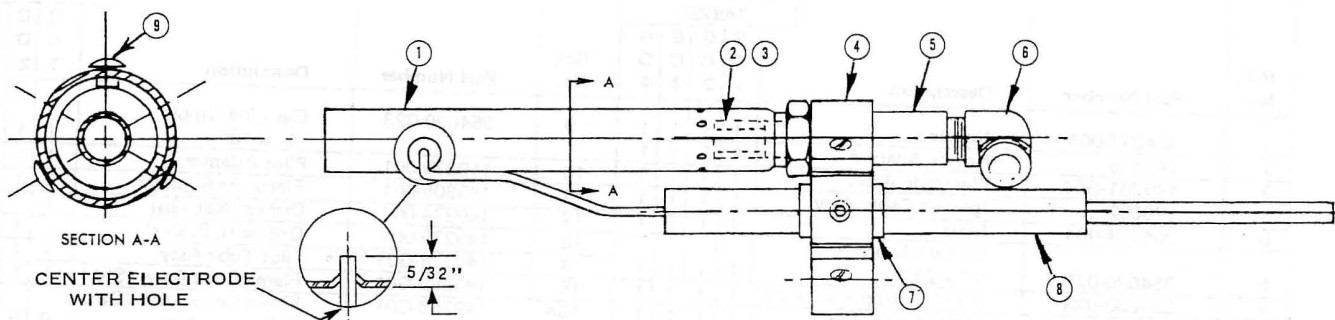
149290-G01 NATURAL GAS PILOT ASSEMBLY (FOR L.P. GAS, SPECIFY 149290-G02) FOR BURNERS AO- 6.3 & 9.8; and PAO - 6.3 & 9.8.
